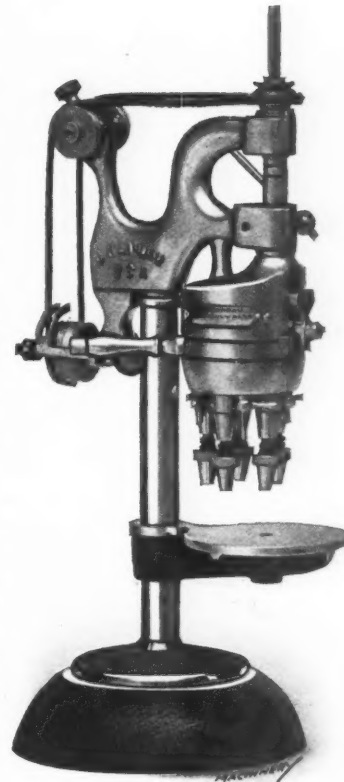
Landau Turret Head Drill with Positive Depth Stops and Tapping Spindle
